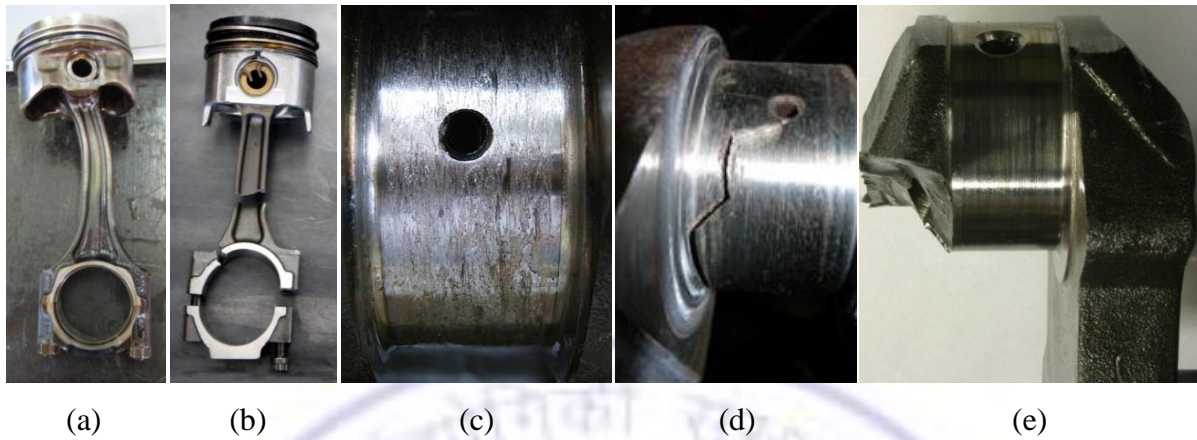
Typical Catastrophic Failures in Cranktrain: (a) Connecting Rod Bend [159], (b) Connecting Rod and Big End Fracture [160], (c) Crank Pin Worn [161], (d) Crank Pin Crack [162] and (e) Crank Web Fracture [163]
